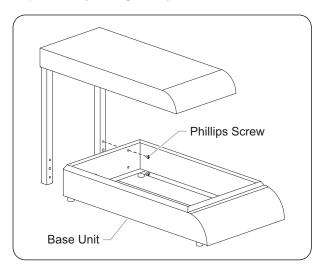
Assembly of Top Housing with Leg Bracket to Base Unit
